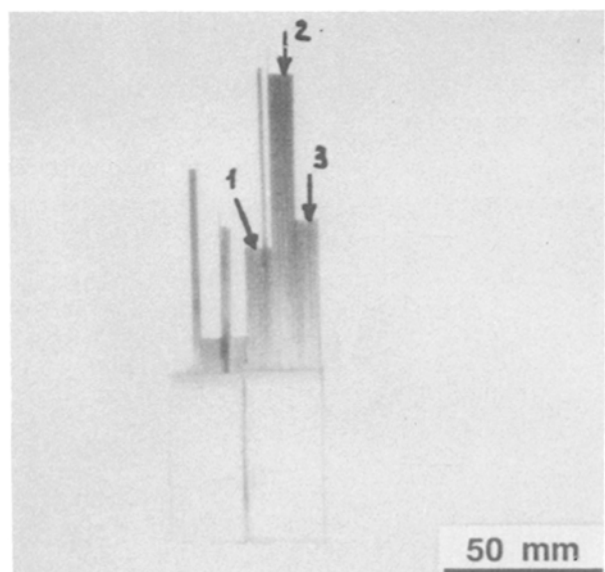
Two fractured tensile specimens. The numbers 1 to 3 mark separate segments of the fracture of the right-hand sample.
